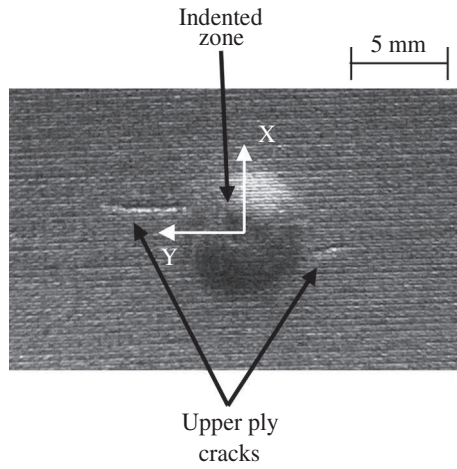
Post-impact cracks: 27.3 J static indentation test on QI plate.
